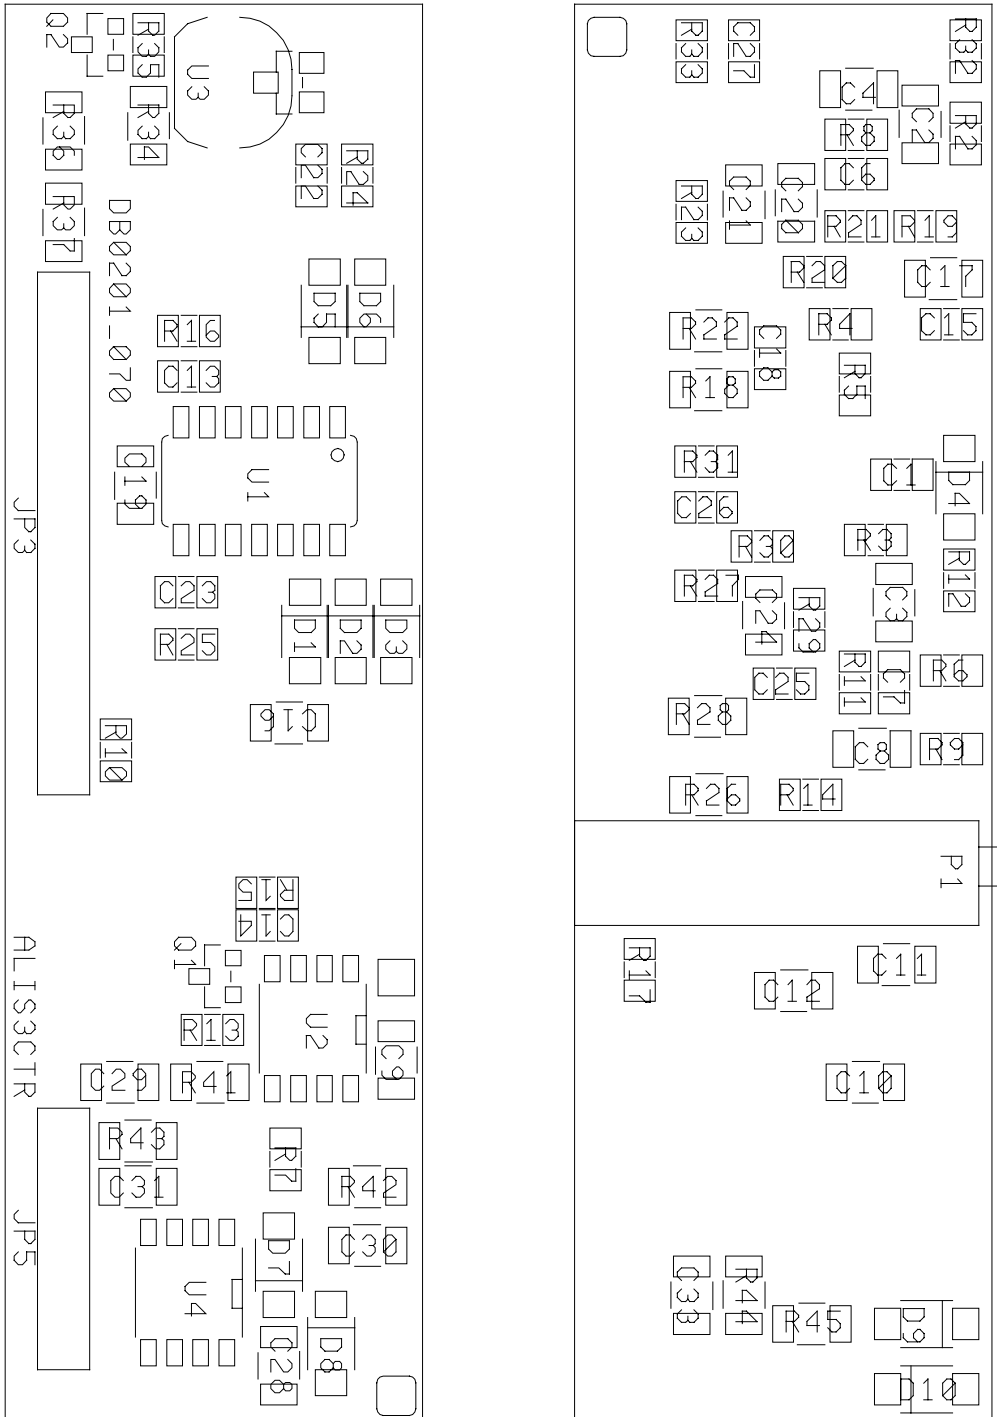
DB 0201_070 PRINTED BOARD COMPONENT LAYOUT
